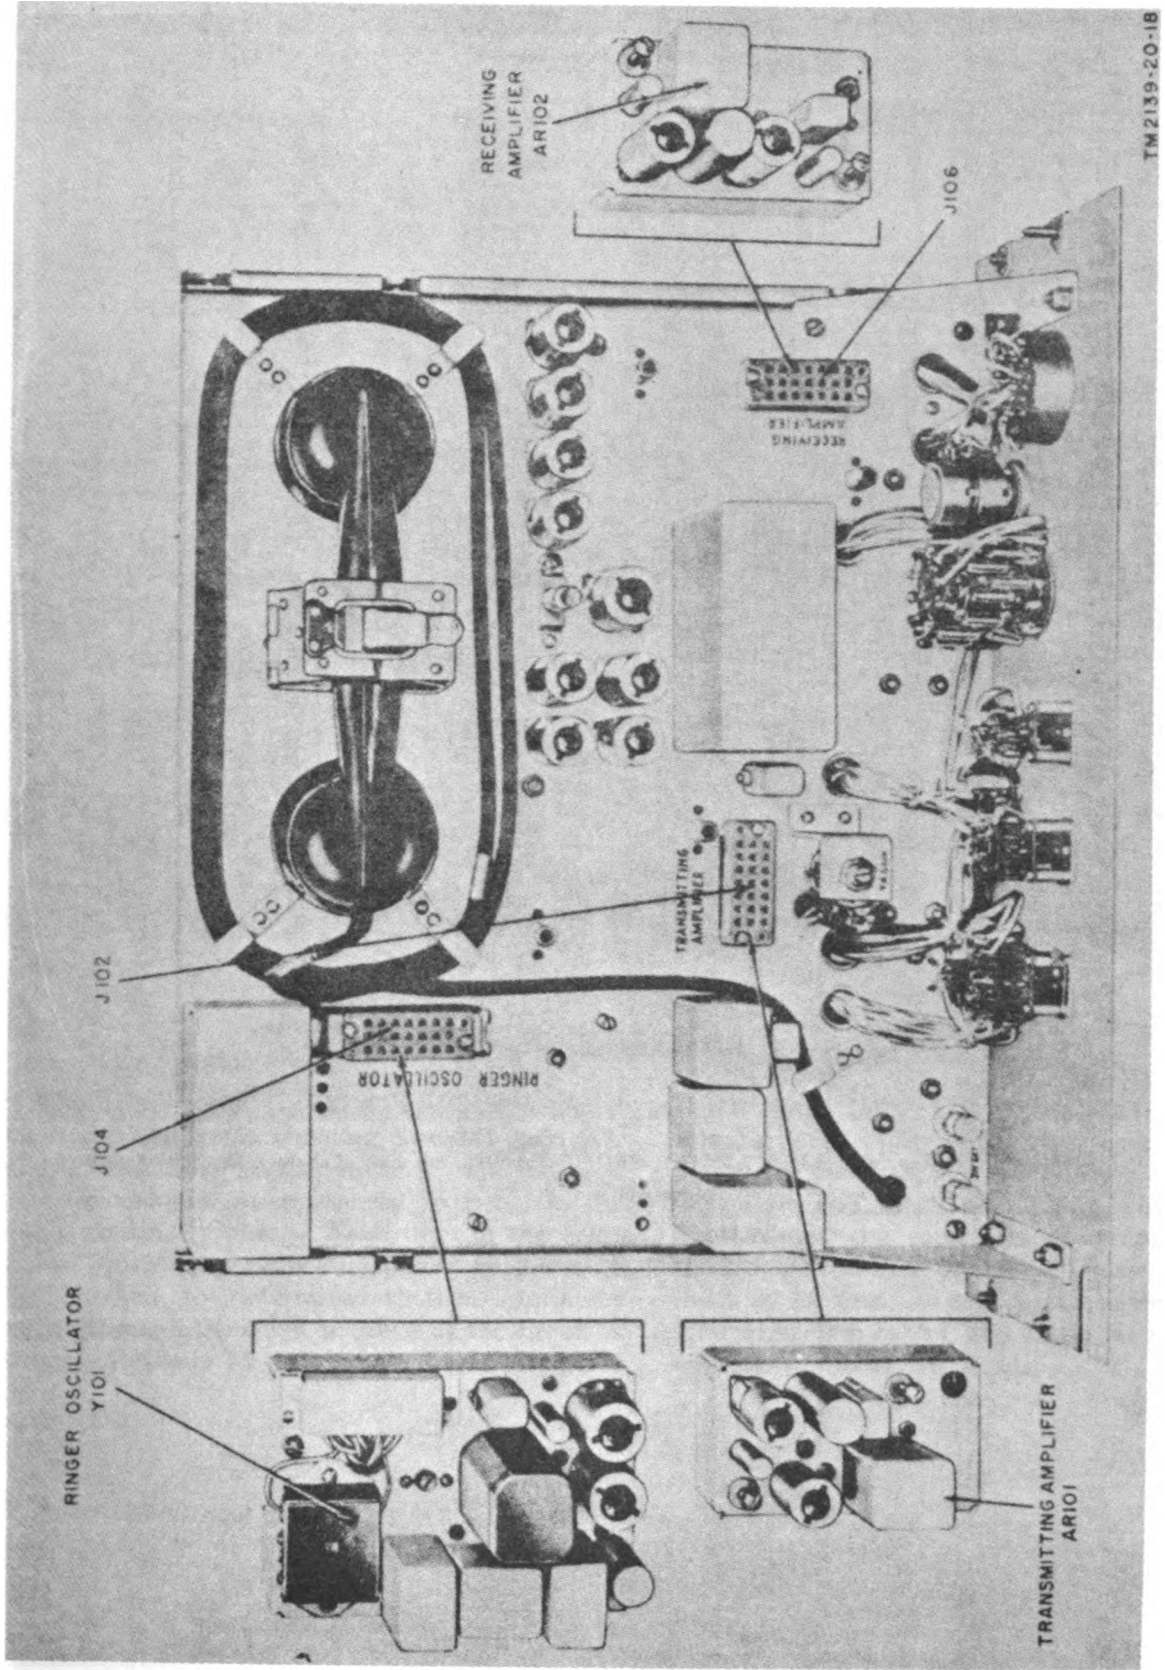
Telephone Test Set TS-760/TCC-7, top view of chassis, location of plug-in assemblies.
